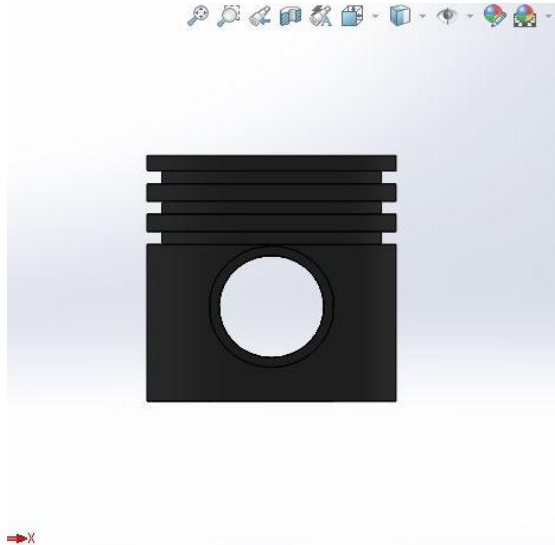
Carbon-Carbon material piston design in SolidWorks
